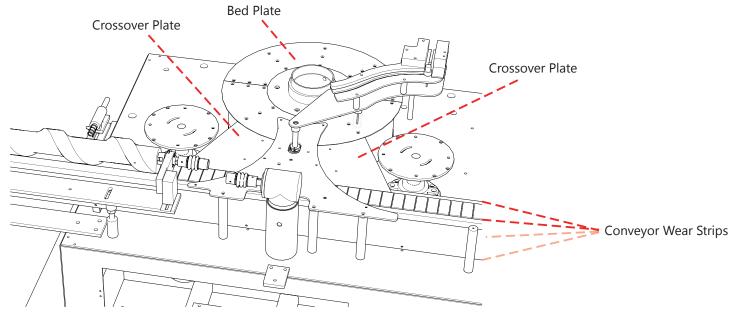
Crossover Plates, Bedplates, and Conveyor Wear Strips
